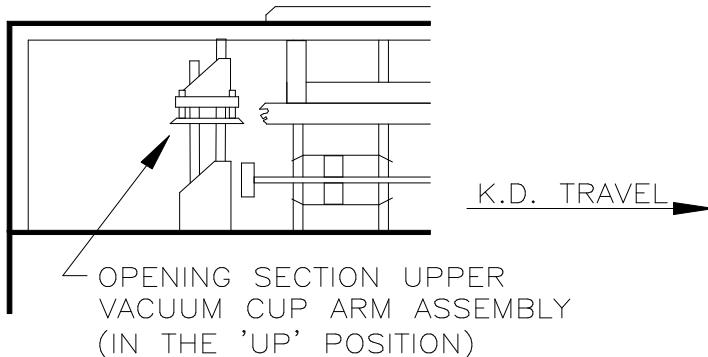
OPENING SECTION UPPER VACUUM CUP IN "UP" POSITION
